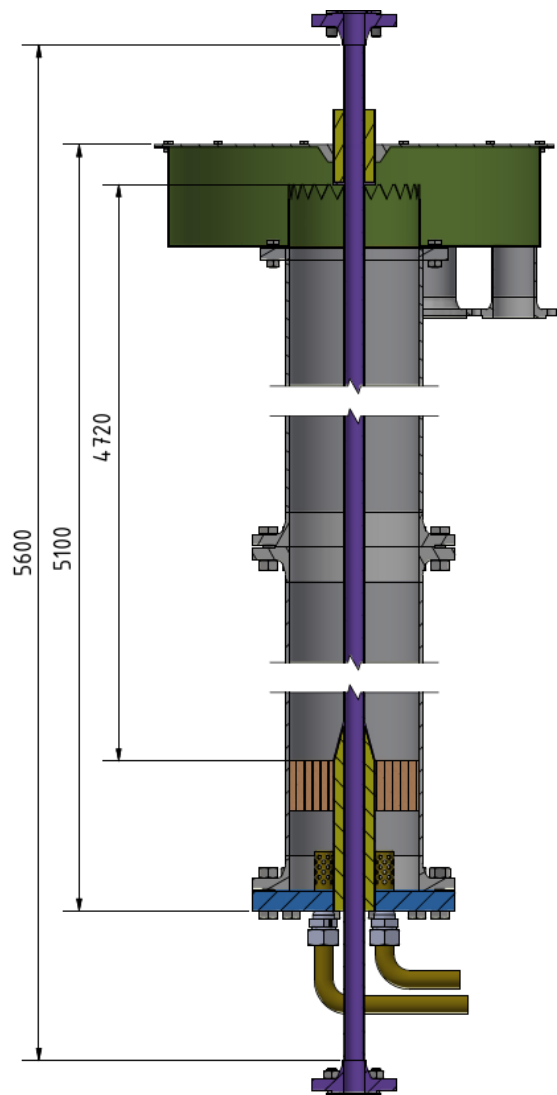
test section, top, mid and bottom sections (cross sectional view)
